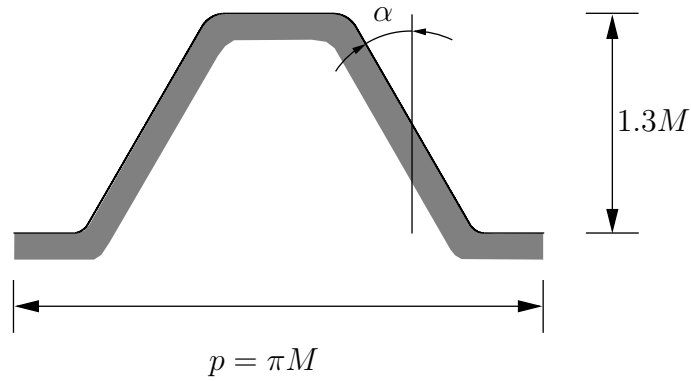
Rack cutter for pinion gear cutter, from (DIN 5480-16 2006). The pitch p is indicated together with the pressure angle α and the tooth height.
